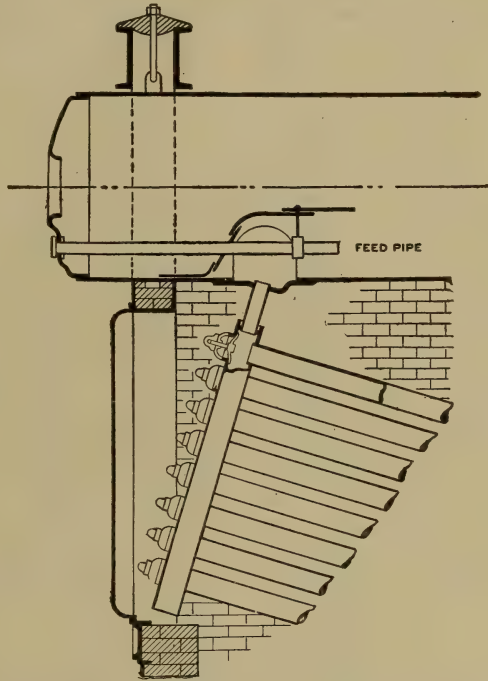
Front Section — Babcock and Wilcox Boiler.
